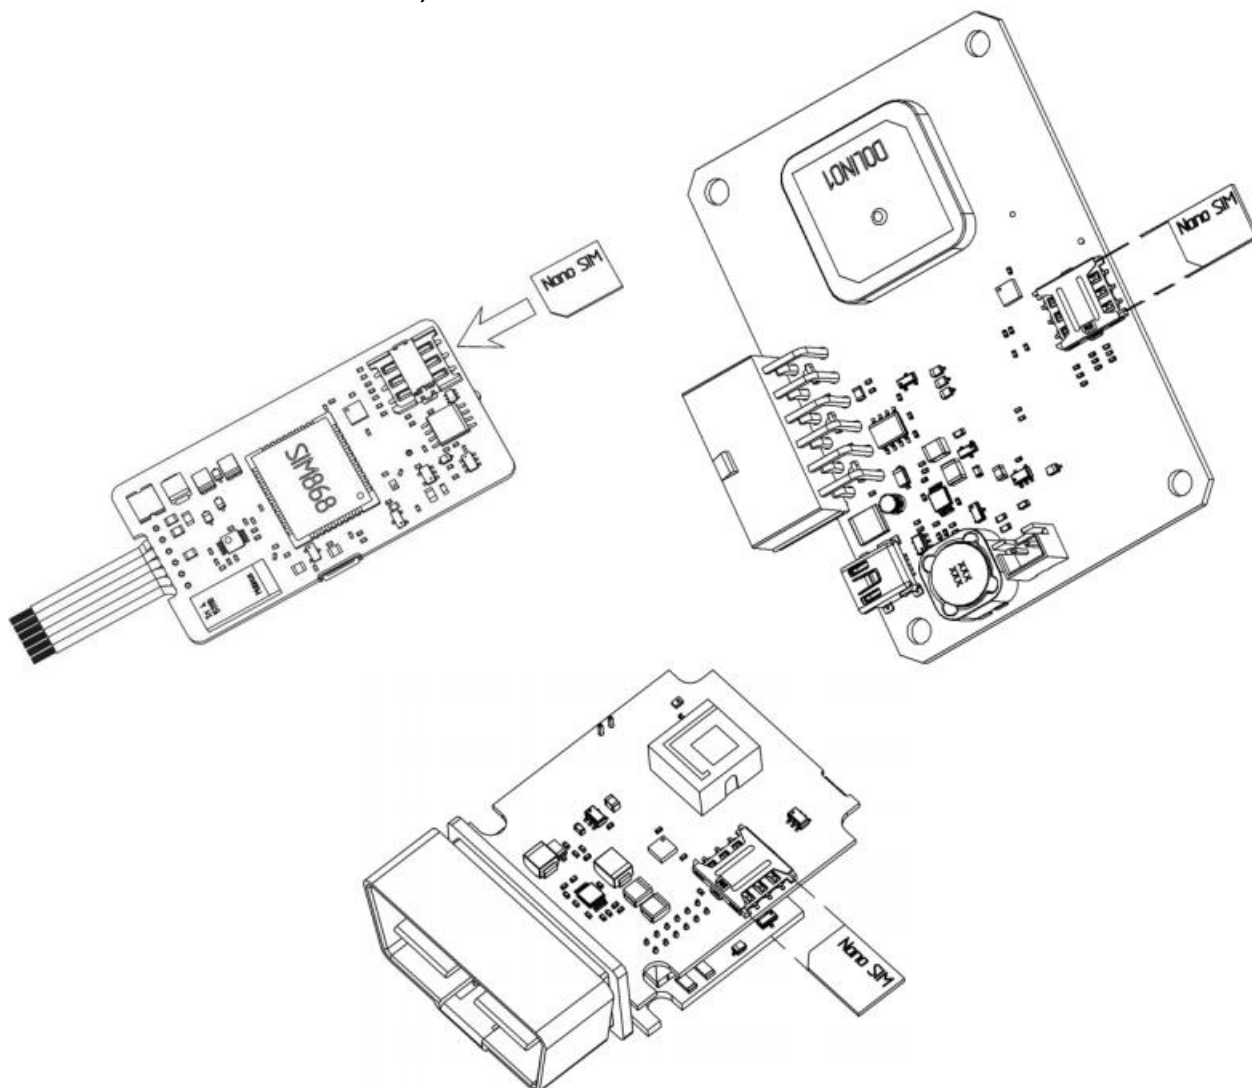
SIM card installation (310 – on the left; 312 – on the right; 311 - below)
